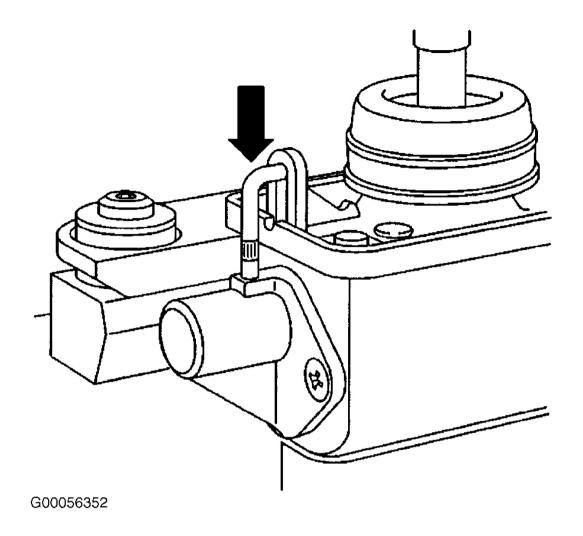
Engaging/Disengaging Shift Control Neutral Lock Pin Courtesy of GENERAL MOTORS CORP.
